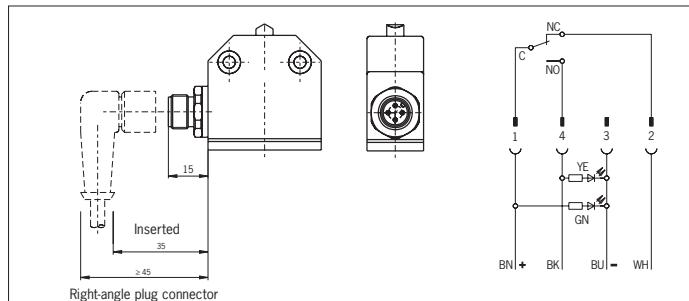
Dimension drawing/connection diagram for N01.550C1526 with plug connector M12 (4-pin)
